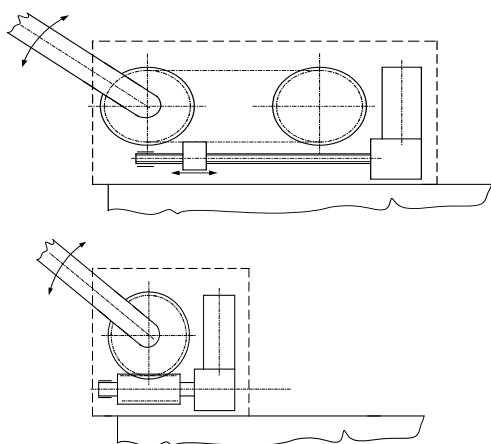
Drive system concepts (above: spindle-nut gear with chain, below: worm-gear)
